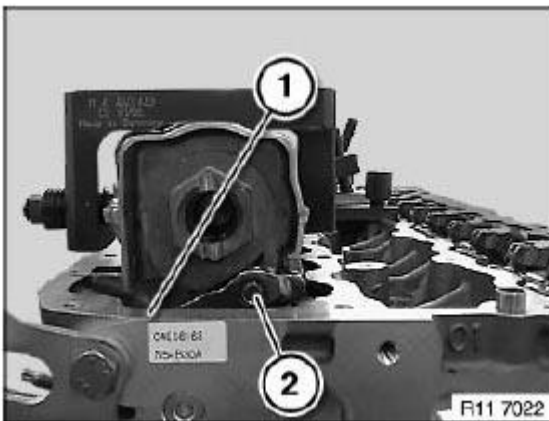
Position Of Intake Camshaft And Roller Cam Follower
